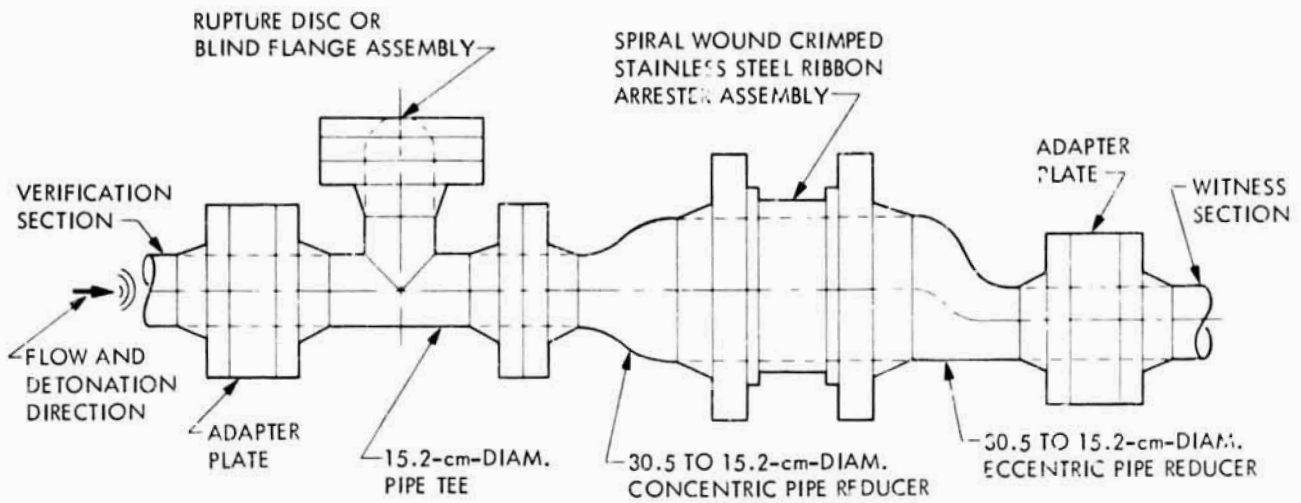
Shand and Jurs Spiral-Wound, Crimped Stainless-Steel Ribbon Arrester Test Assembly with Direct Connect Inlet Schematic Drawing
